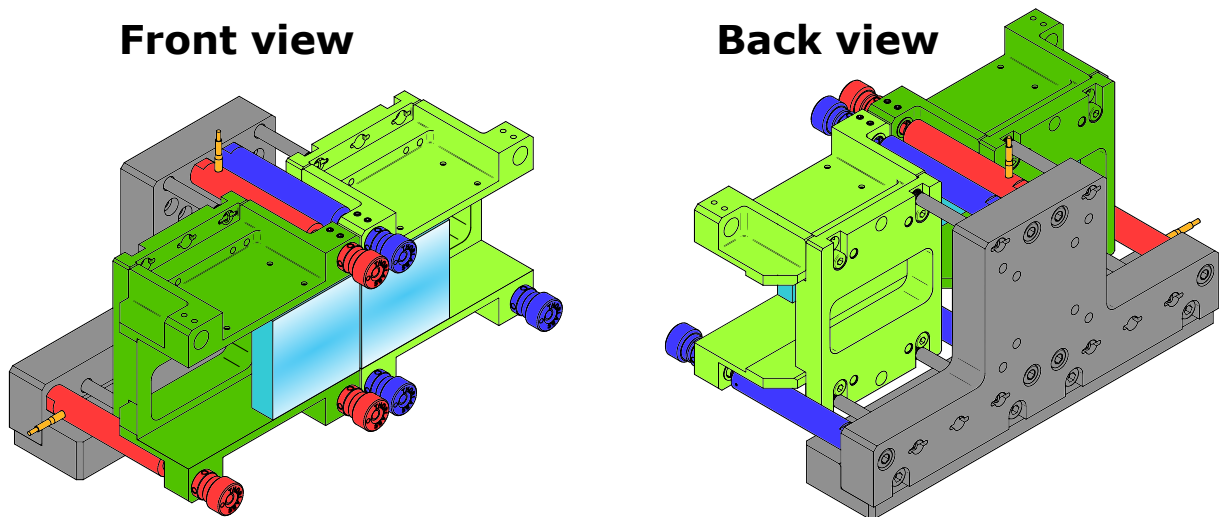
Front and back view of the SDU device that was used during the experiments. The grey parts are fixed components that are used to mount the device onto the optical table, and to hold the movable constituting parts of the SDU. The movable parts are the light and dark green elements which serve as the mounts of the utilized reflective optics (light blue elements) that are $50.8 \text{ mm} \times 50.8 \text{ mm}$, square-shaped protected silver mirrors. The dark blue components are manually adjustable actuators. The red elements are also actuators but they are combined with high-accuracy piezoelectric positioners, in which the small orange parts demonstrate the electrical connections.
